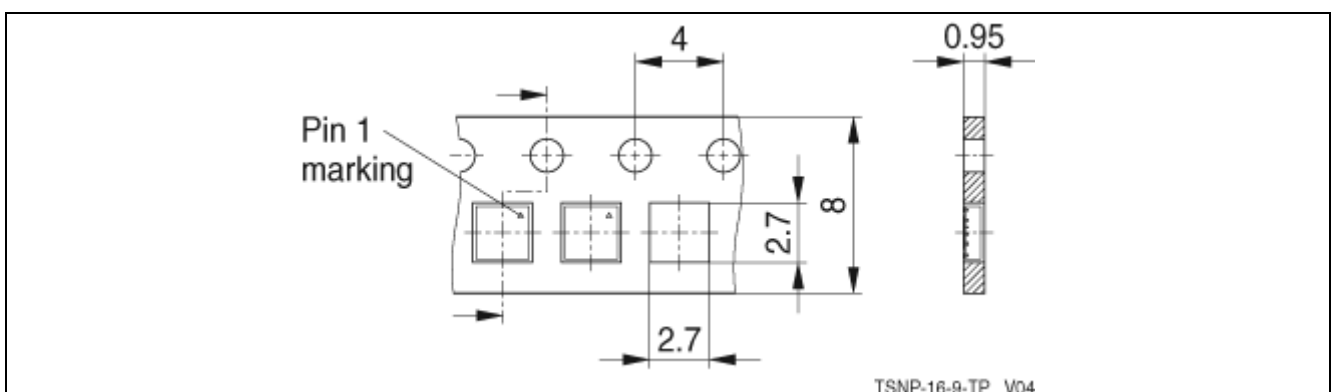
Packing Description of TSNP-16-9; \emptyset Reel: 180 mm, Pieces / Reel: 3000, Reels / Box: 1
